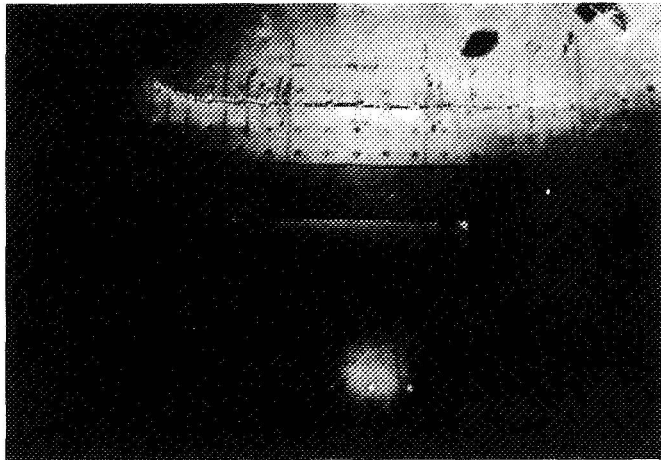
Crack progression during multiple site damage test on panel 74-A lap joint.
